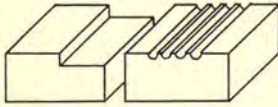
Cope cutting. Single knife set-up required for tenons over $\frac{1}{2}$ in. long. Tenons up to about $1\frac{1}{4}$ in. long can be completely cut with the shaper knife. Tenons longer than this are preferably roughed cut on the circular saw before coping.
